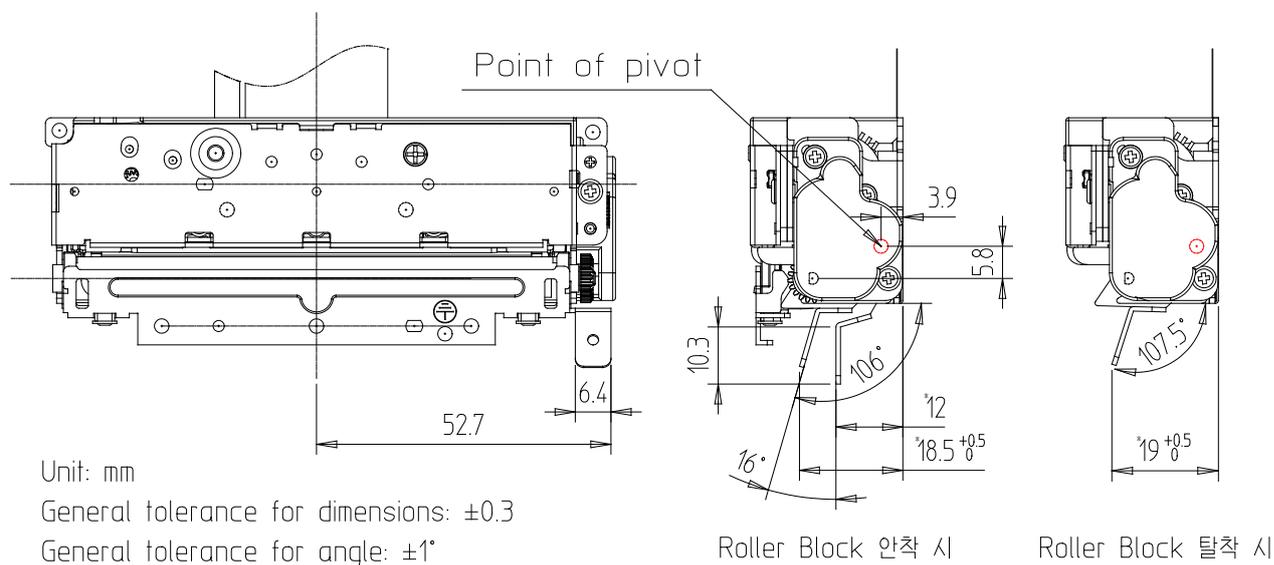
Dimensions related to the operation of the platen roller block removal lever
